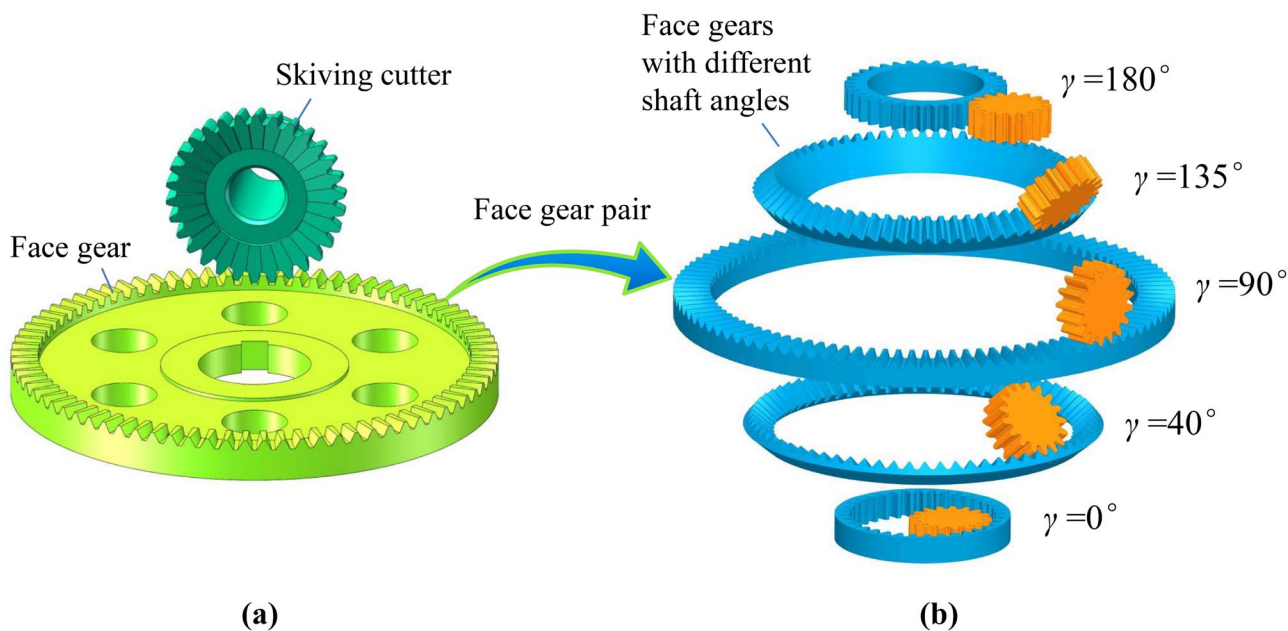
Face gear and skiving process model: a face gear skiving process; b evolution of face gears with different shaft angles
